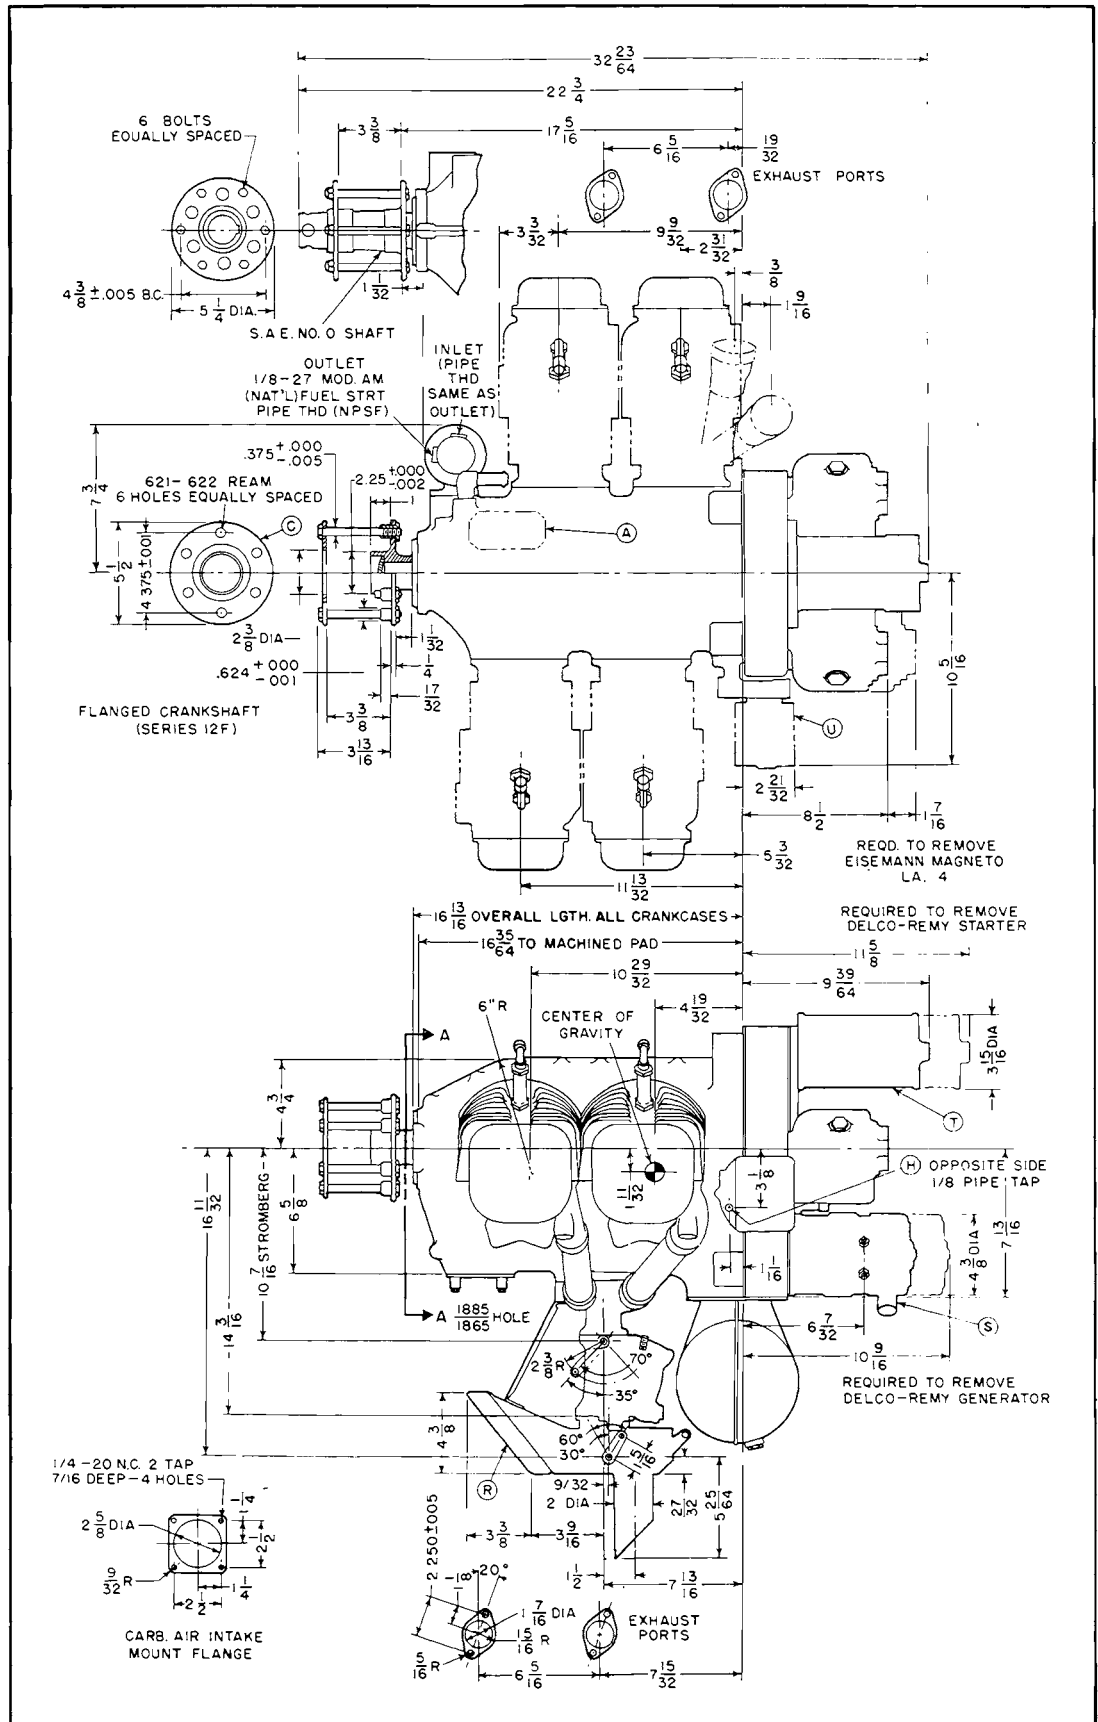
Installation Drawing for -12, -14 & -16 Models, Side and Top Views.
